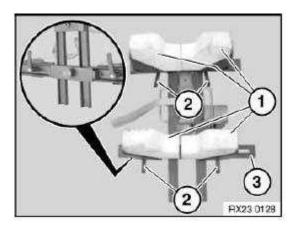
Supports, Screws, Carrier And Rear Supports Courtesy of BMW OF NORTH AMERICA, INC.
